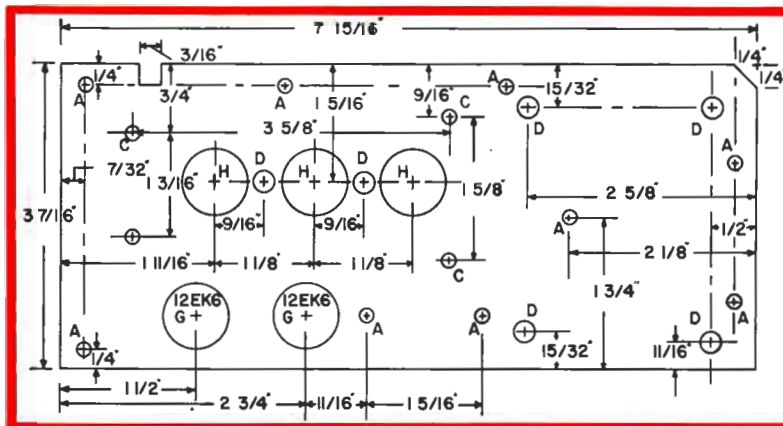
CHASSIS LAYOUT DIAGRAM for the VHF receiver. Layout for a 3-section Inductuner is shown. Hole sizes are given in TABLE II—HOLE SIZE CHART. Chassis material is $\frac{1}{16}$ -inch thick aluminum.
